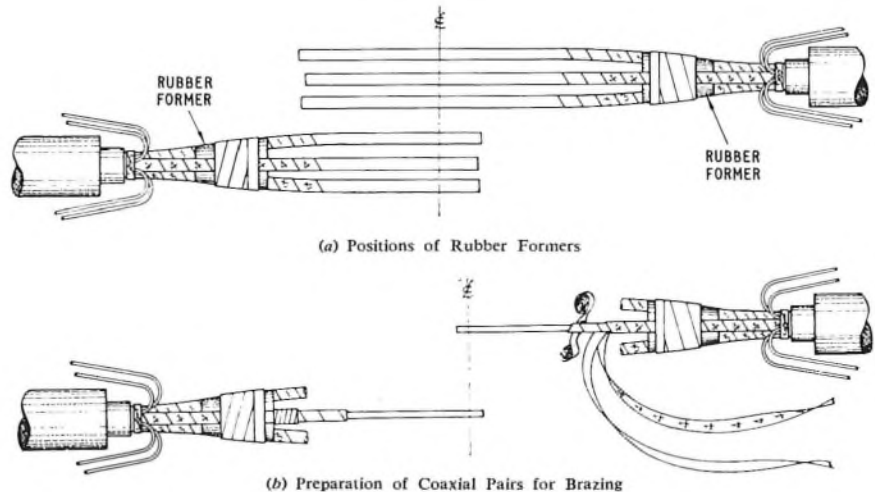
PRELIMINARY STAGES IN JOINTING 4-COAXIAL-PAIR CABLE
